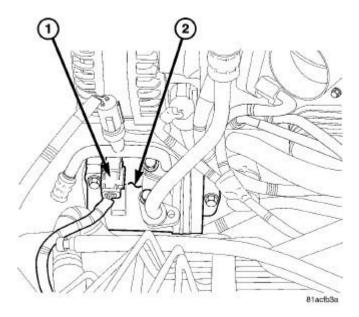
A/C COMPRESSOR Courtesy of CHRYSLER LLC
